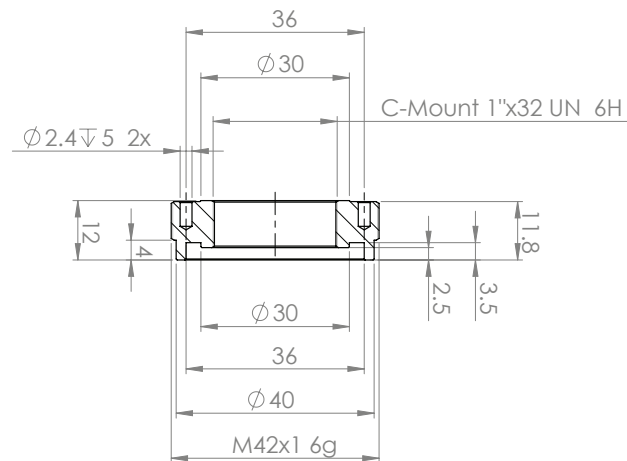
Mechanical dimensions of the MV4 C-mount M42 adapter
